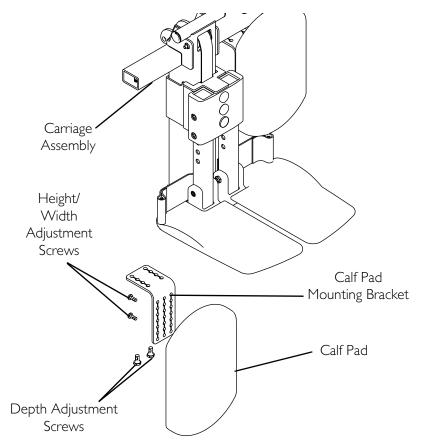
Calf Pad Adjustment for Power Center Mount Footrests
